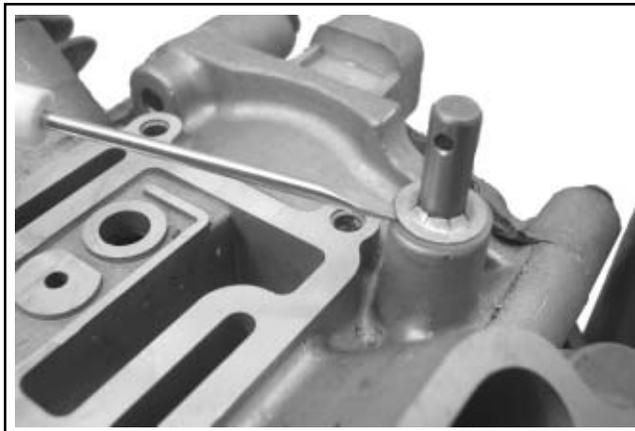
Removing Governor Cross Shaft Retainer (8 mm Shaft Design).
